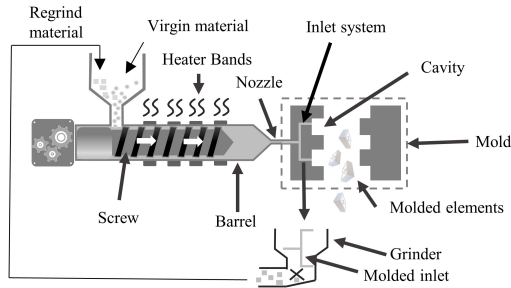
An injection molding setup where the left part is the barrel of the molding machine and the mold is represented on the right. The grinder used to grind the inlet from the mold is placed underneath the mold.
